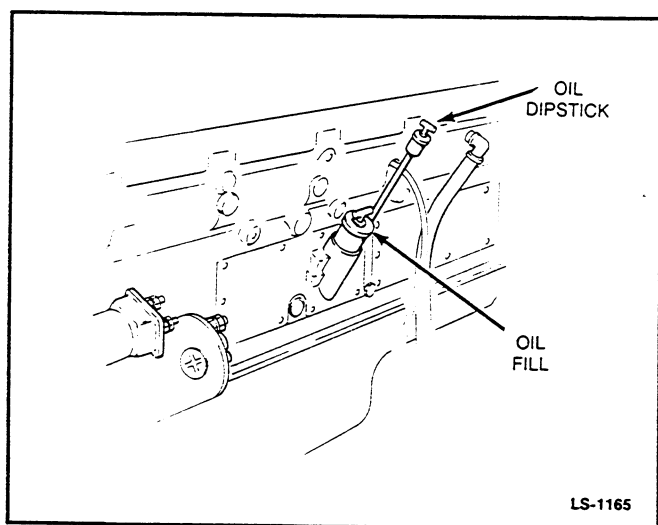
OIL FILL AND DIPSTICK LOCATION
